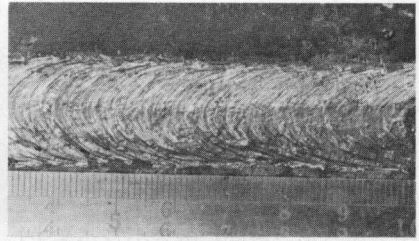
Typical penetration beads of butt welding. conditions: 70° angle of Vee, torch speed 45~55 cm/min.
